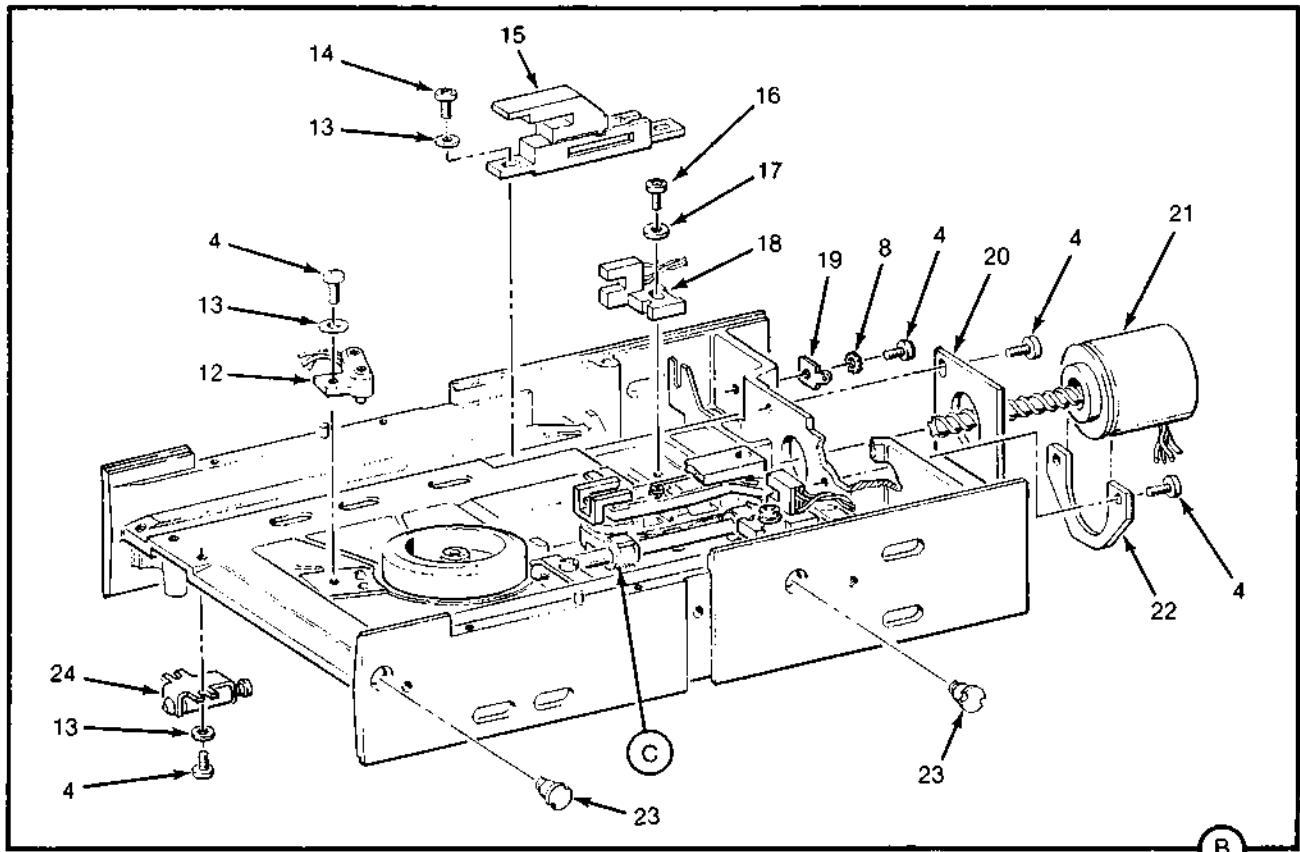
SA810/860 DISKETTE DRIVE, EXPLODED VIEW (SHEET 1 OF 3)
